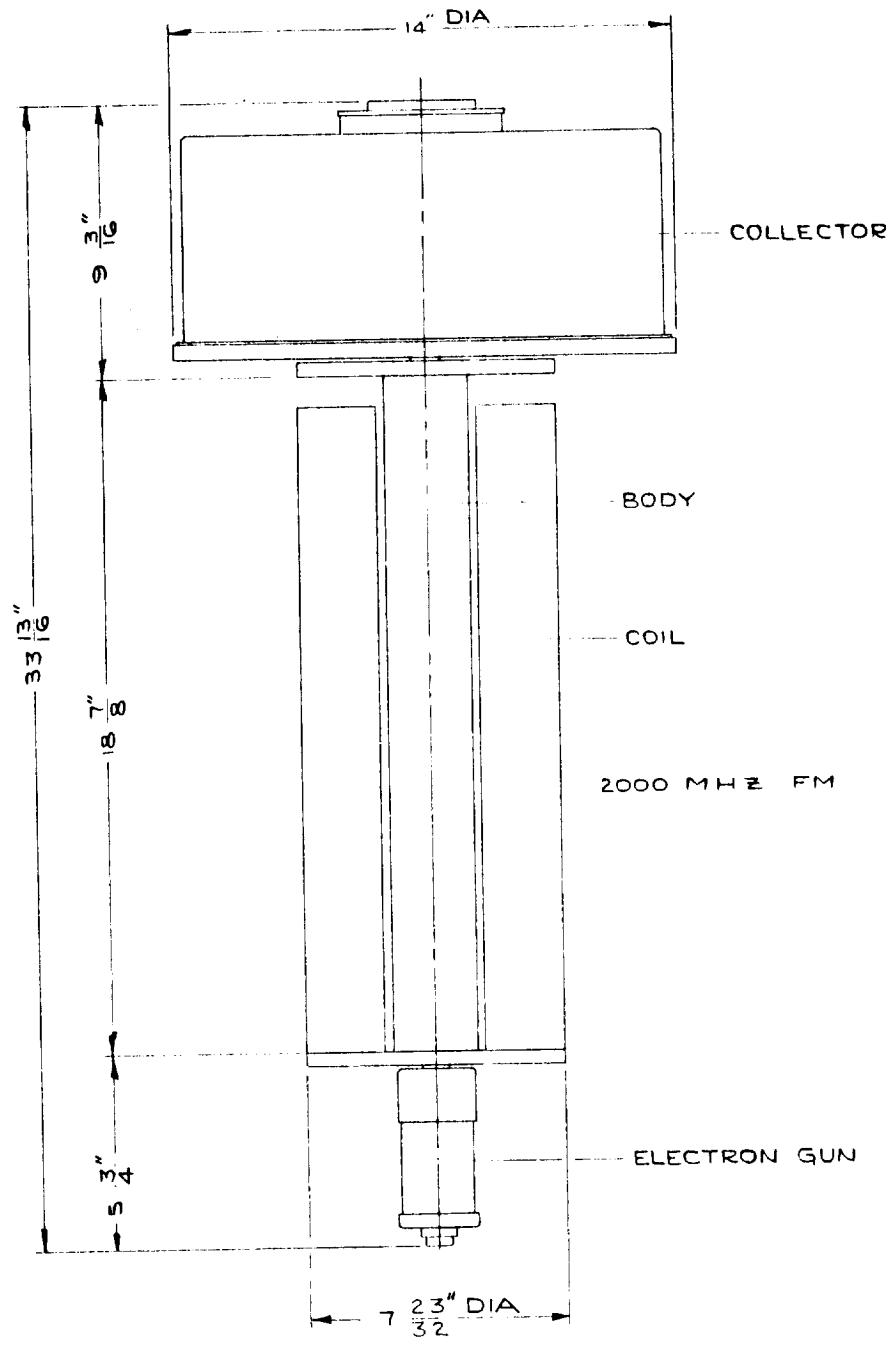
Outline Sketch of 2000-MHz FM Klystron and Solenoid Assembly
